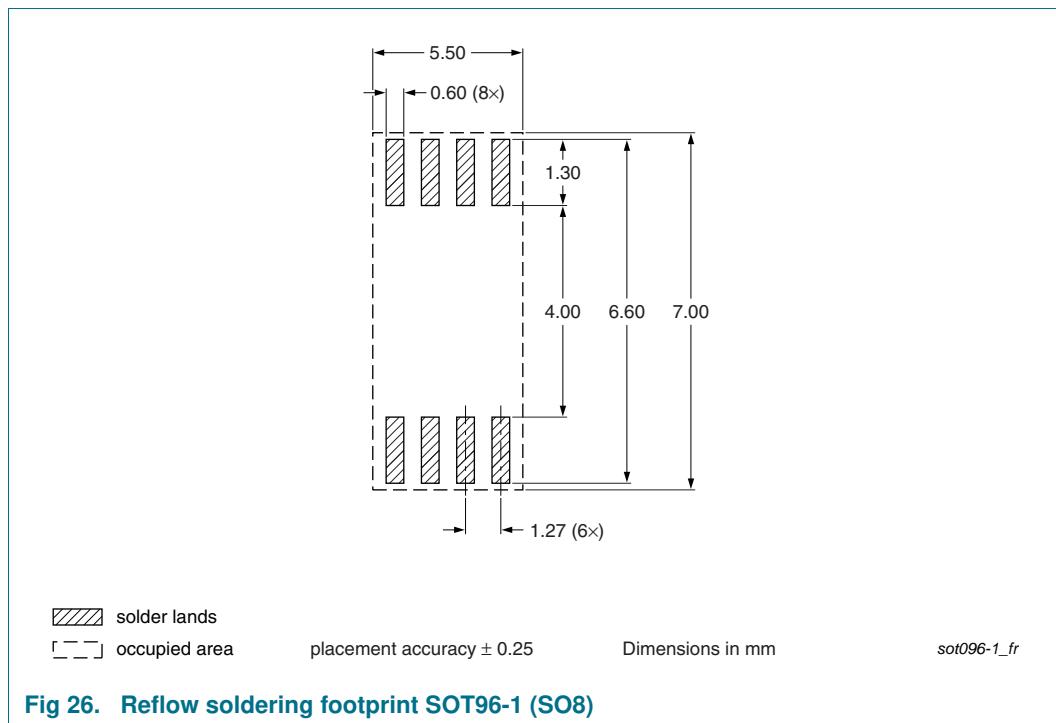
Reflow soldering footprint SOT96-1 (SO8)
